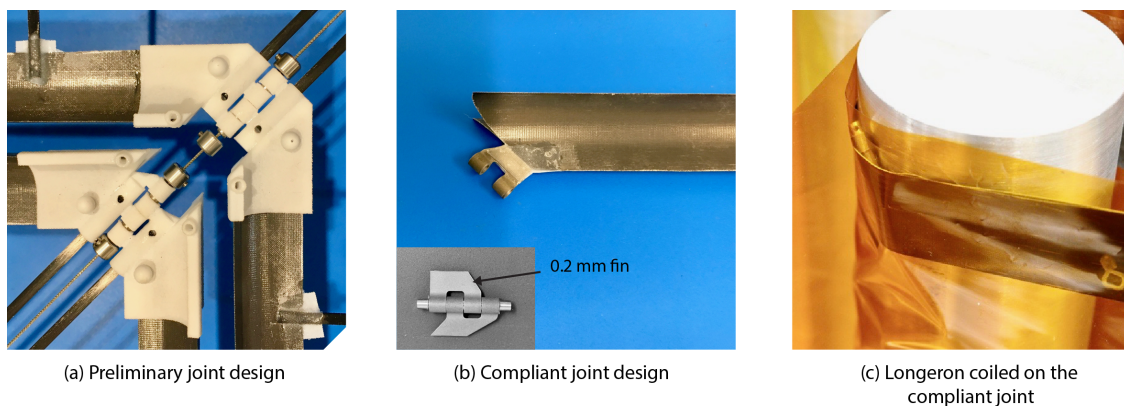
Kinematic joint designs connecting to thin-shells. (a) displays a 3D-printed joint with integrated pockets and slots to host the shell and the diagonal batten. (b) shows a compliant double-strap joint consisting of a steel hinge with a 0.2 mm fin which is fabricated with EDM and two adhesively bonded glass-fiber doublers. During spacecraft packaging, longerons are coiled on top of each other, which results in local buckling of the longeron for this particular design (c).
